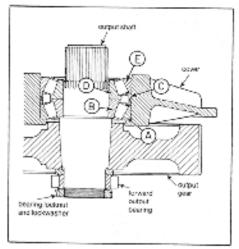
Sub-assembly including output gear and shaft, cover and bearings.
